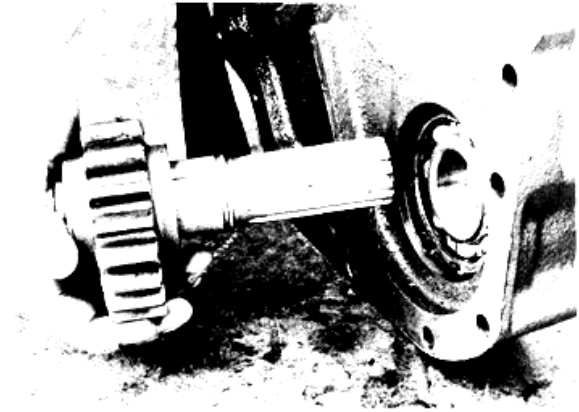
Removing P.T.O. Driven Gear (if fitted)
